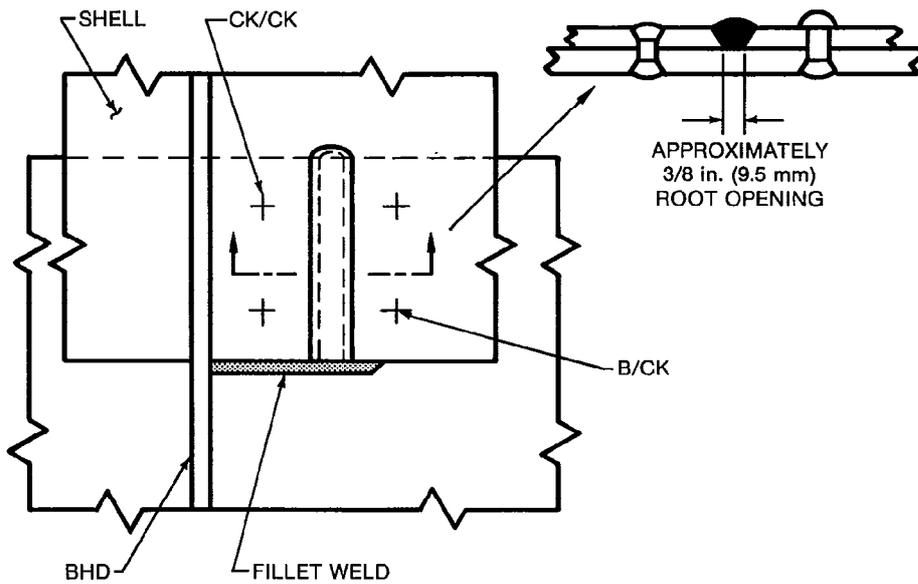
Welded Stops at Riveted Seam Lap
